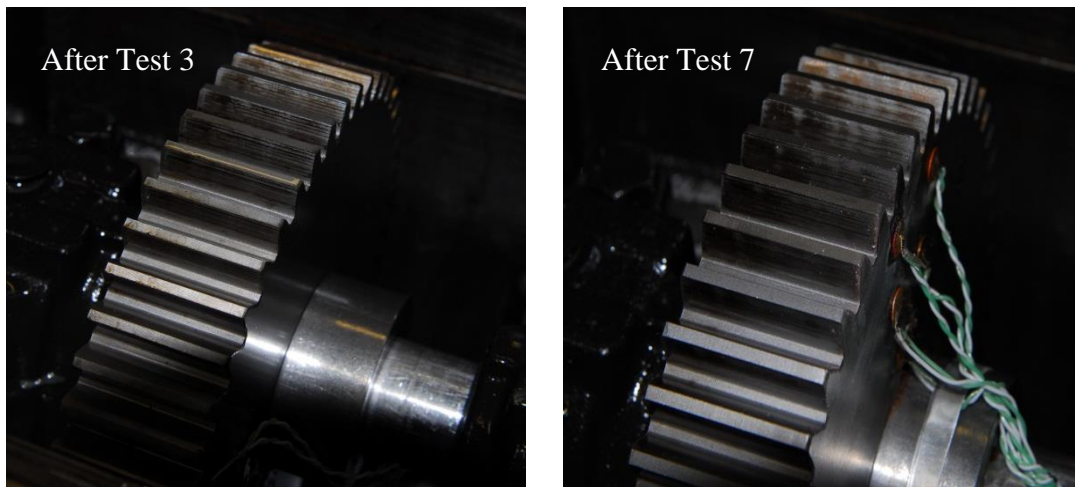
Undamaged gear with lubricious residue on teeth surface after Test 3 and Test 7
